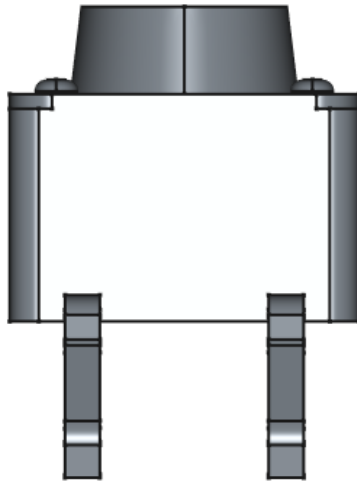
Front View of Push Button(Produced using FreeCADweb)
